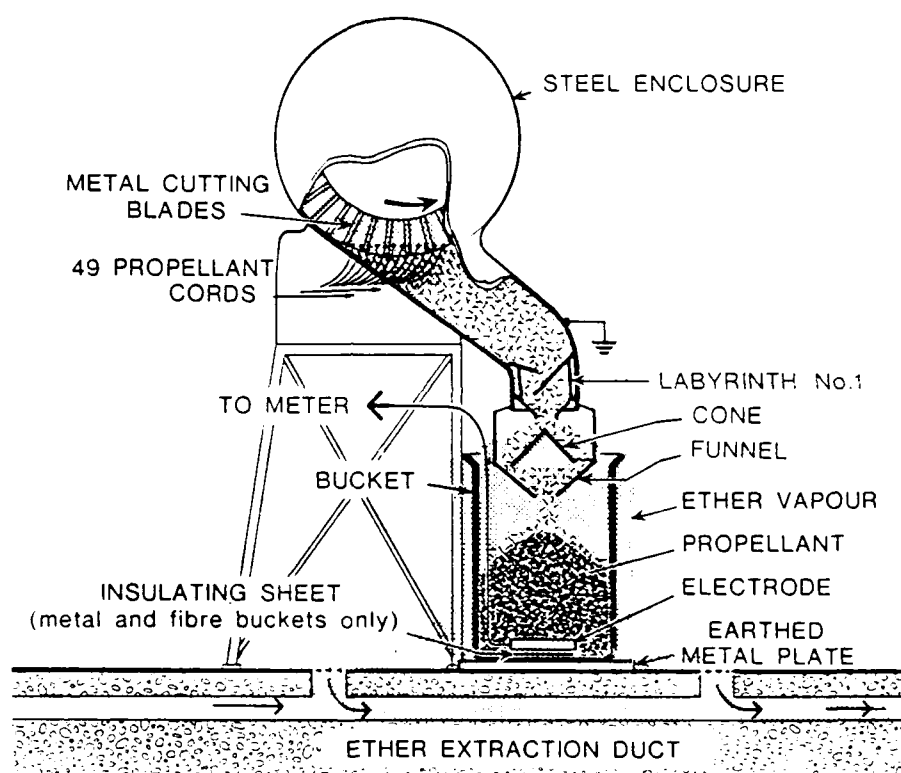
Sectional view of the cutting machine showing flow of propellant over the labyrinth and cone.
